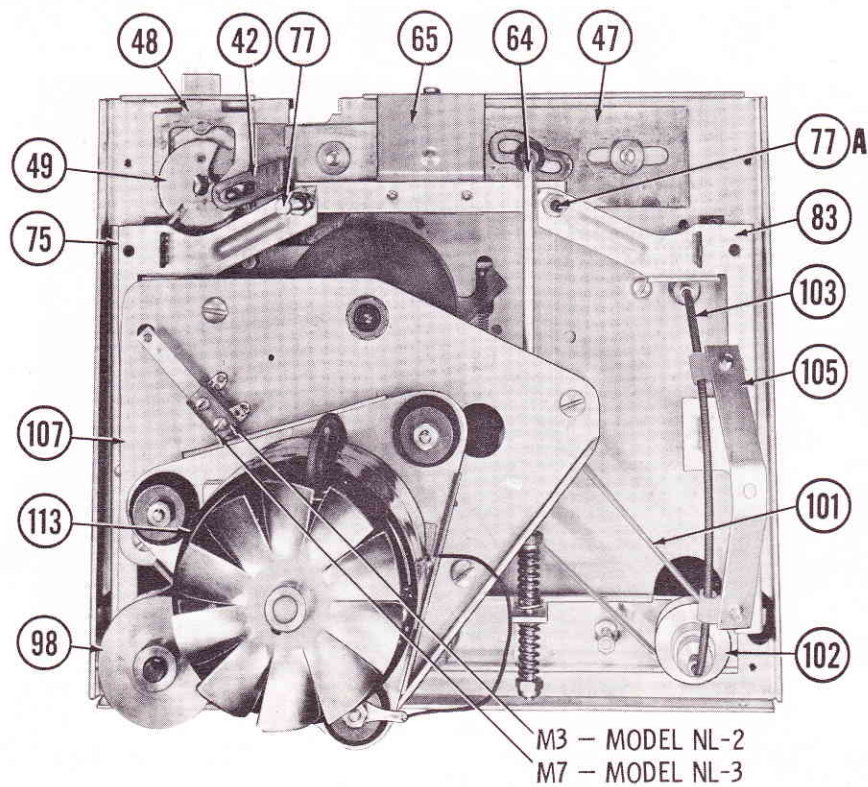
Bottom View Of NL-2 & NL-3 Mechanism.
